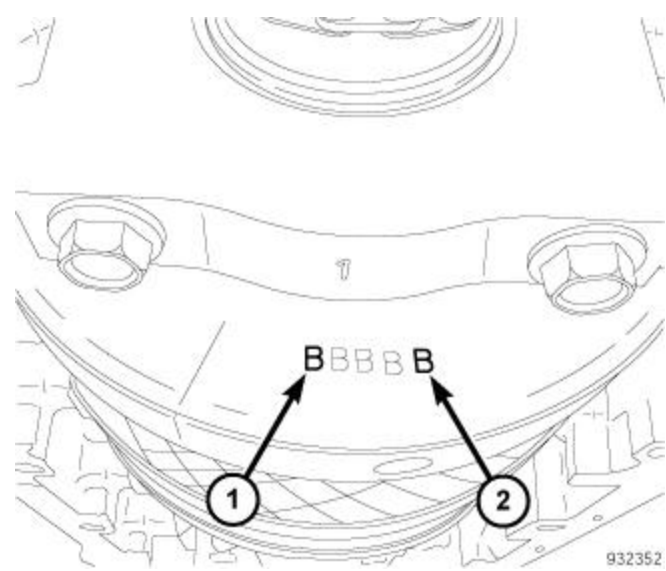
Crankshaft Counterweight Stamped Grade Identification Marks
